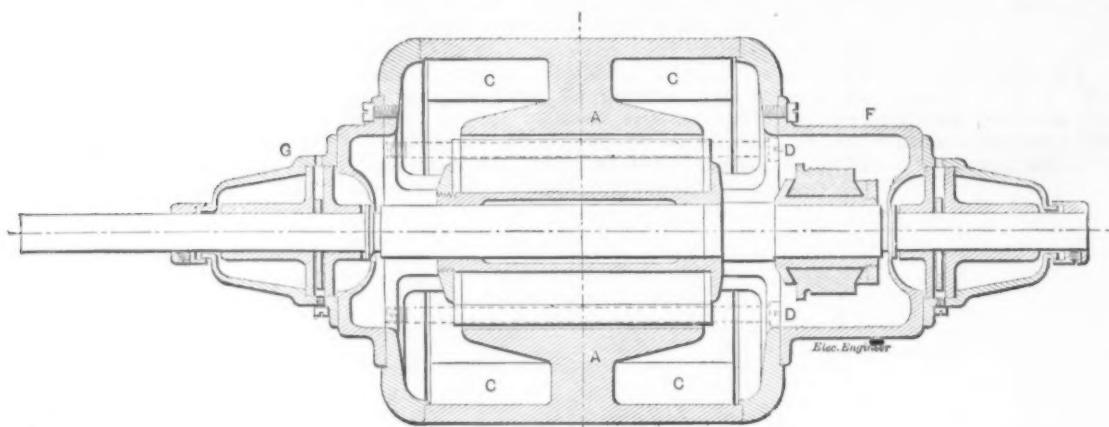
Longitudinal Section through T-Shaped Pole Pieces.
